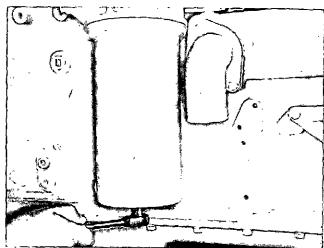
(N10098) Removing tubricating oil filter, 927 C.I.D. Series
